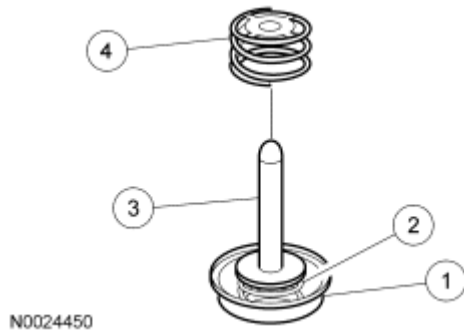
Identifying Intermediate & Overdrive Servo Assembly Components
